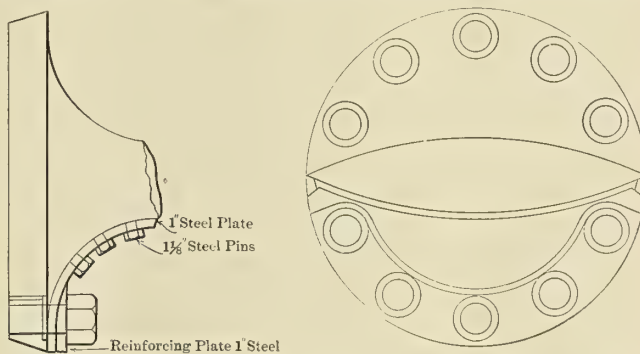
SKETCH SHOWING LOCATION OF FRACTURE IN PROPELLER BLADE
